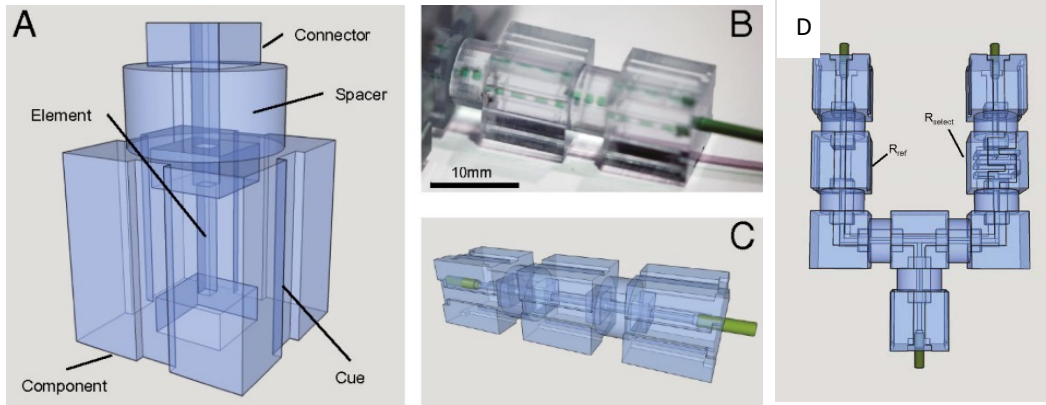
(A) CAD assembly drawing of a 1-mm male-male connector aligned with female-type port terminating a 750- $\mu\text{m}$  microfluidic element of straight pass type. (B) The flat mating surfaces of the connector pin and port allow for easy optical inspection of the connector-element channel junction. (C) Chip-to-world interfacing is performed through a single component that reversibly seals to standardized 1/16" PEEK tubing. (D) CAD assembly drawing for a 2-input, 1-output concentration gradient generator in which a single branch resistor varies the mixing ratio. Reproduced from [63] with permission from the National Academy of Sciences.
